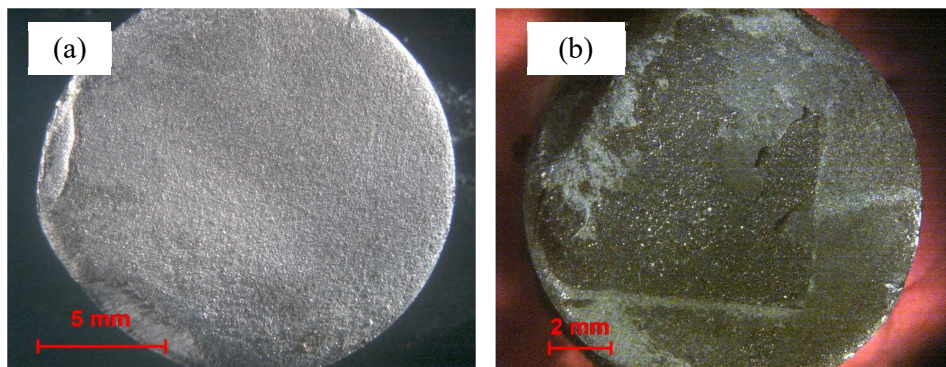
Macroscopic examination on the fracture surface of failed hex bolts: (a) Sample B (b) Sample D.
